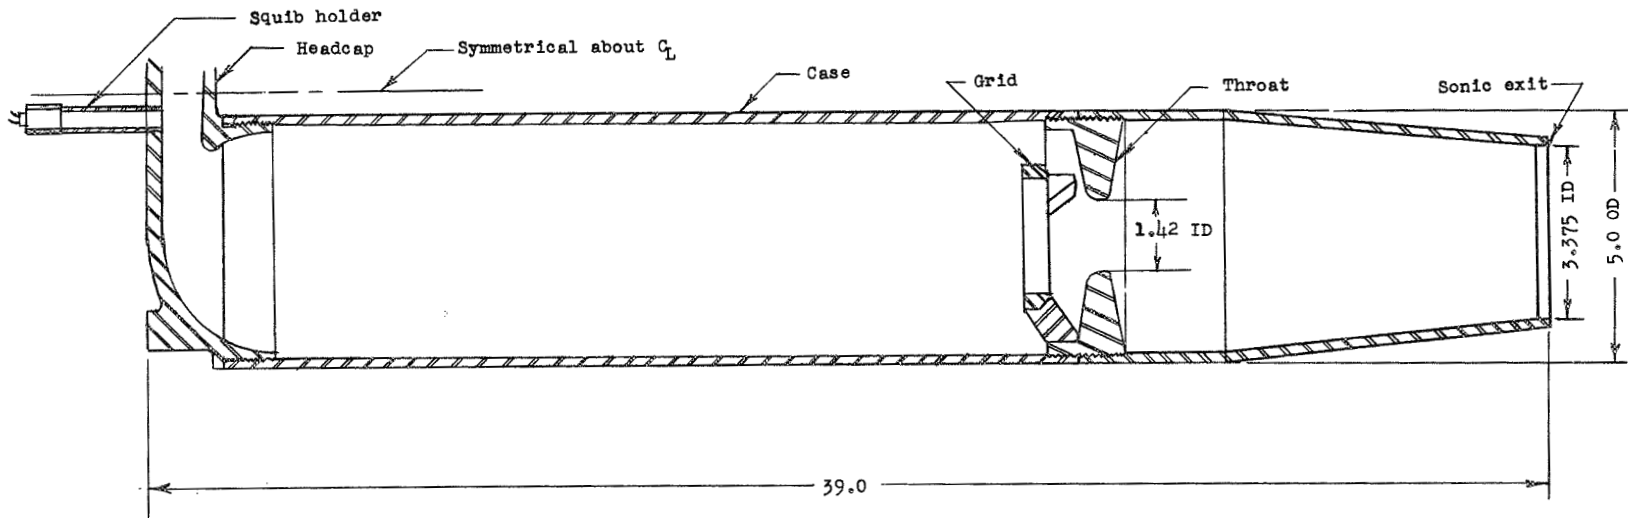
Sketch of rocket simulator. All dimensions are in inches.
